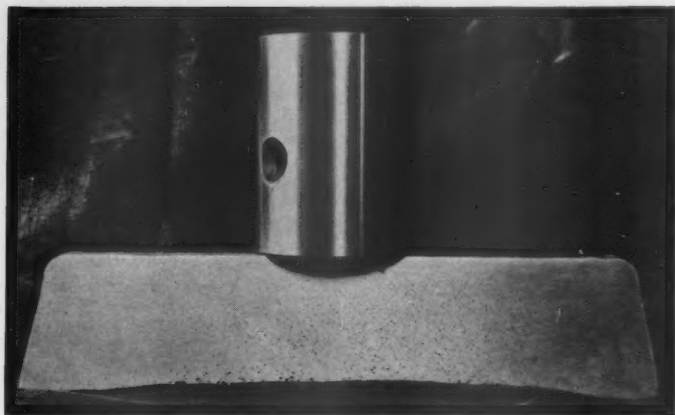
MACHINED CROSS-SECTION OF ALUMINUM-ALLOY INGOT AND CASTING MADE FROM INGOT. POROSITY APPARENT IN THIS INGOT IS NOT APPARENT IN RESULTING CASTING.
